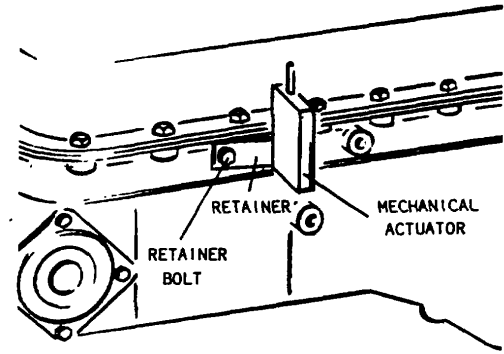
Installing Mechanical Actuator retainer bolt
